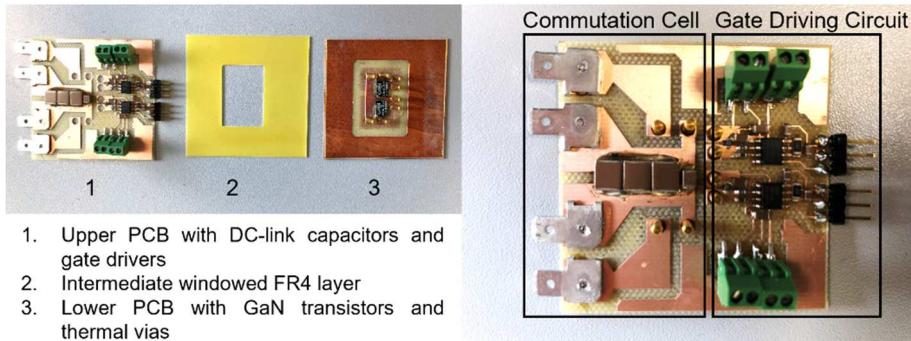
Presentation of the fabricated parts and the assembly of the proposed M-PCB half-bridge
